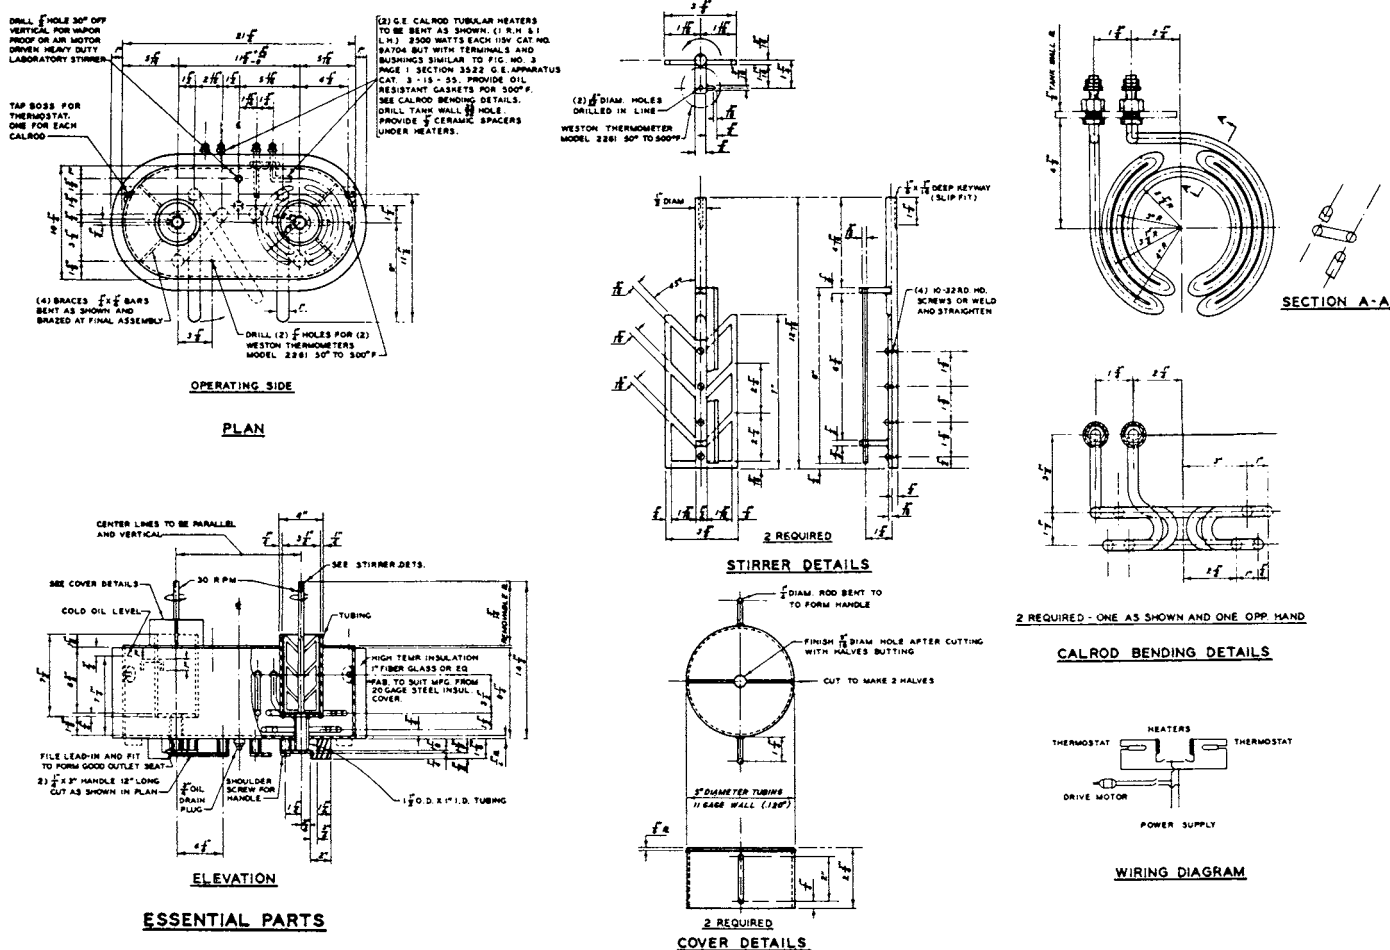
Detailed Drawing of Joint Sealant Laboratory Melting Unit
